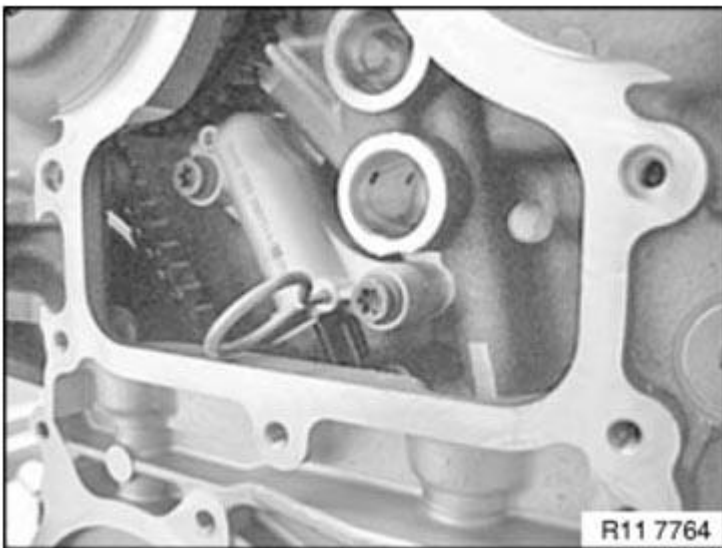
Identifying Chain Tensioner Piston Retracted Over Its Full Length
